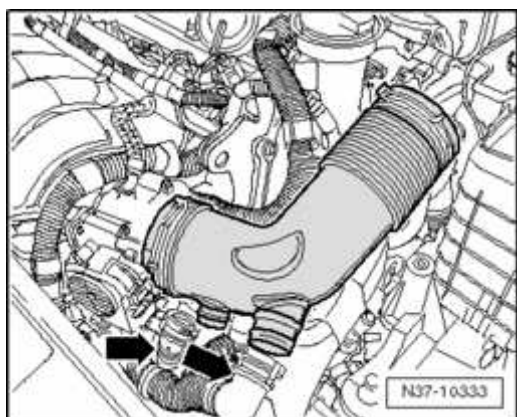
Identifying Intake Hose And Throttle Valve Unit
